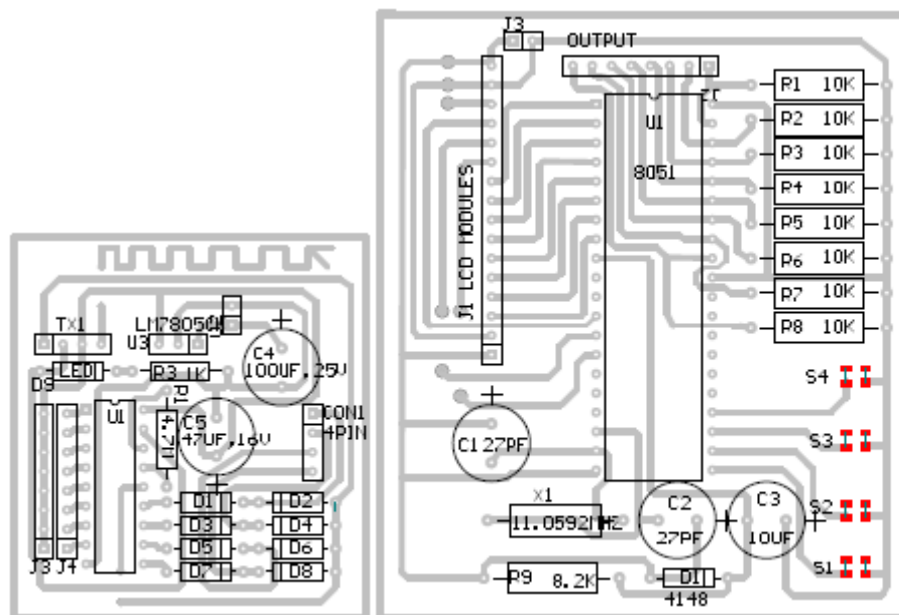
Solder Side PCB layout :- (a) Receiver Section
